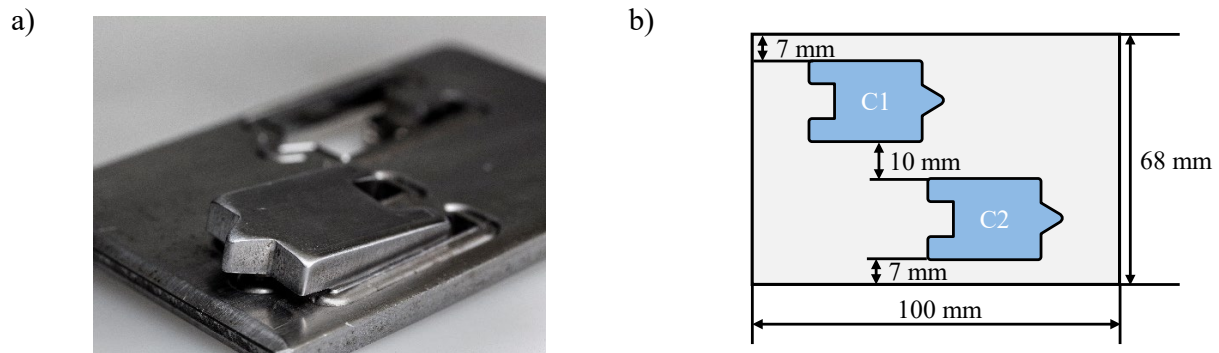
Arrow part geometry, photograph a) and fine blanking layout b)
